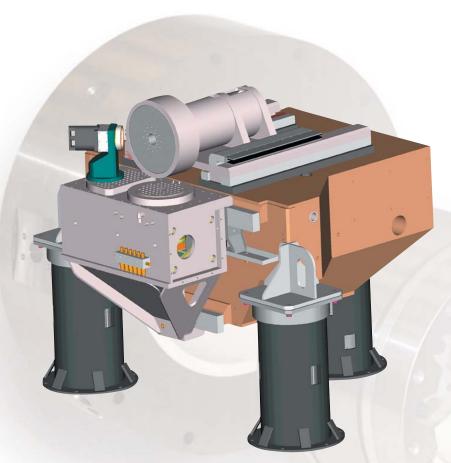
Conceptual drawing of the new Precision Optical Grinder and Lathe (POGAL) machine, the next-generation machine tool at LLNL.
